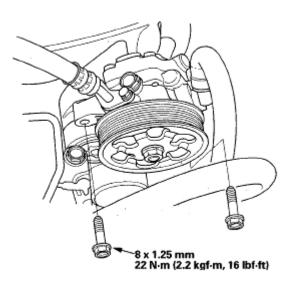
Identifying Power Steering (P/S) Pump Bolts
